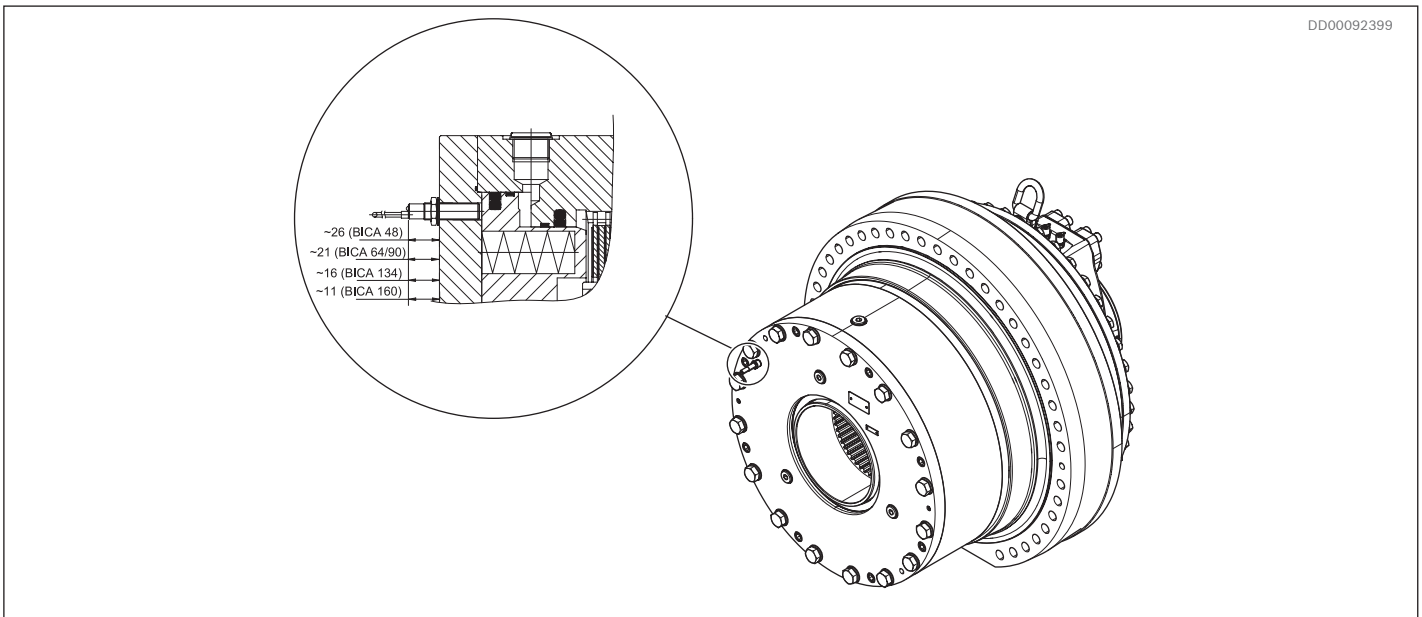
Hägglunds CB motor with BICA brake and inductive position sensor
